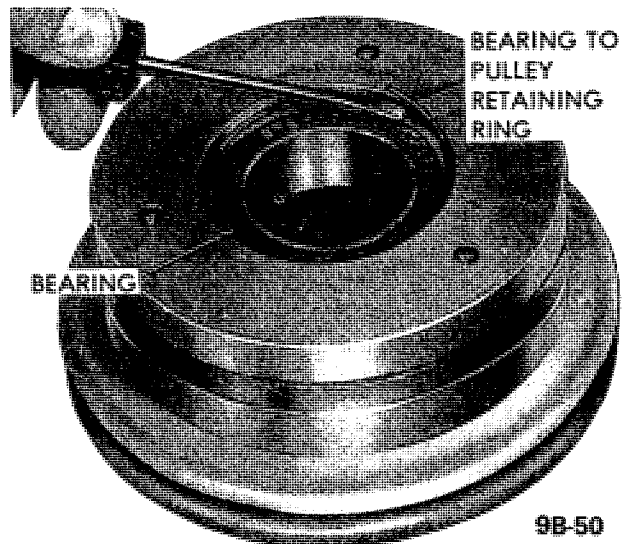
B-74 Removing Pulley Bearing Retainer - 6 Cylinder Compressor
